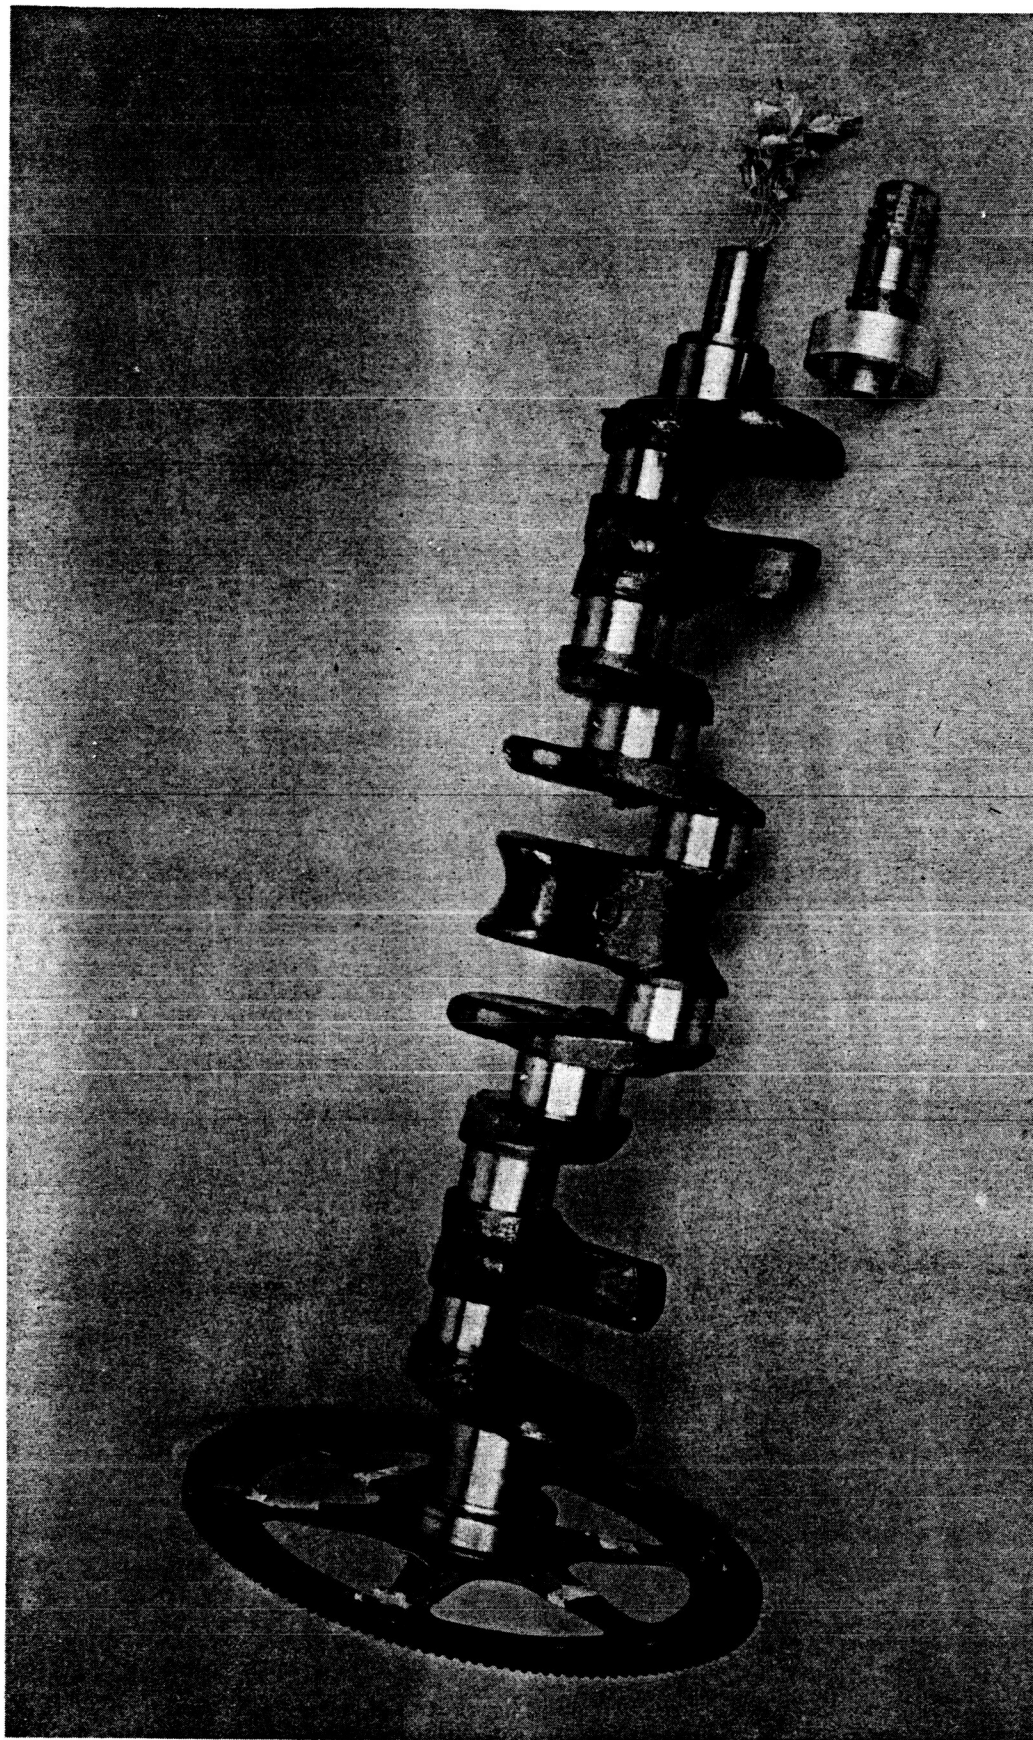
Strain Gages on Flywheel. Wires Threaded Through Crankshaft to Slipping Assembly, Shown Detached from Crankshaft.
